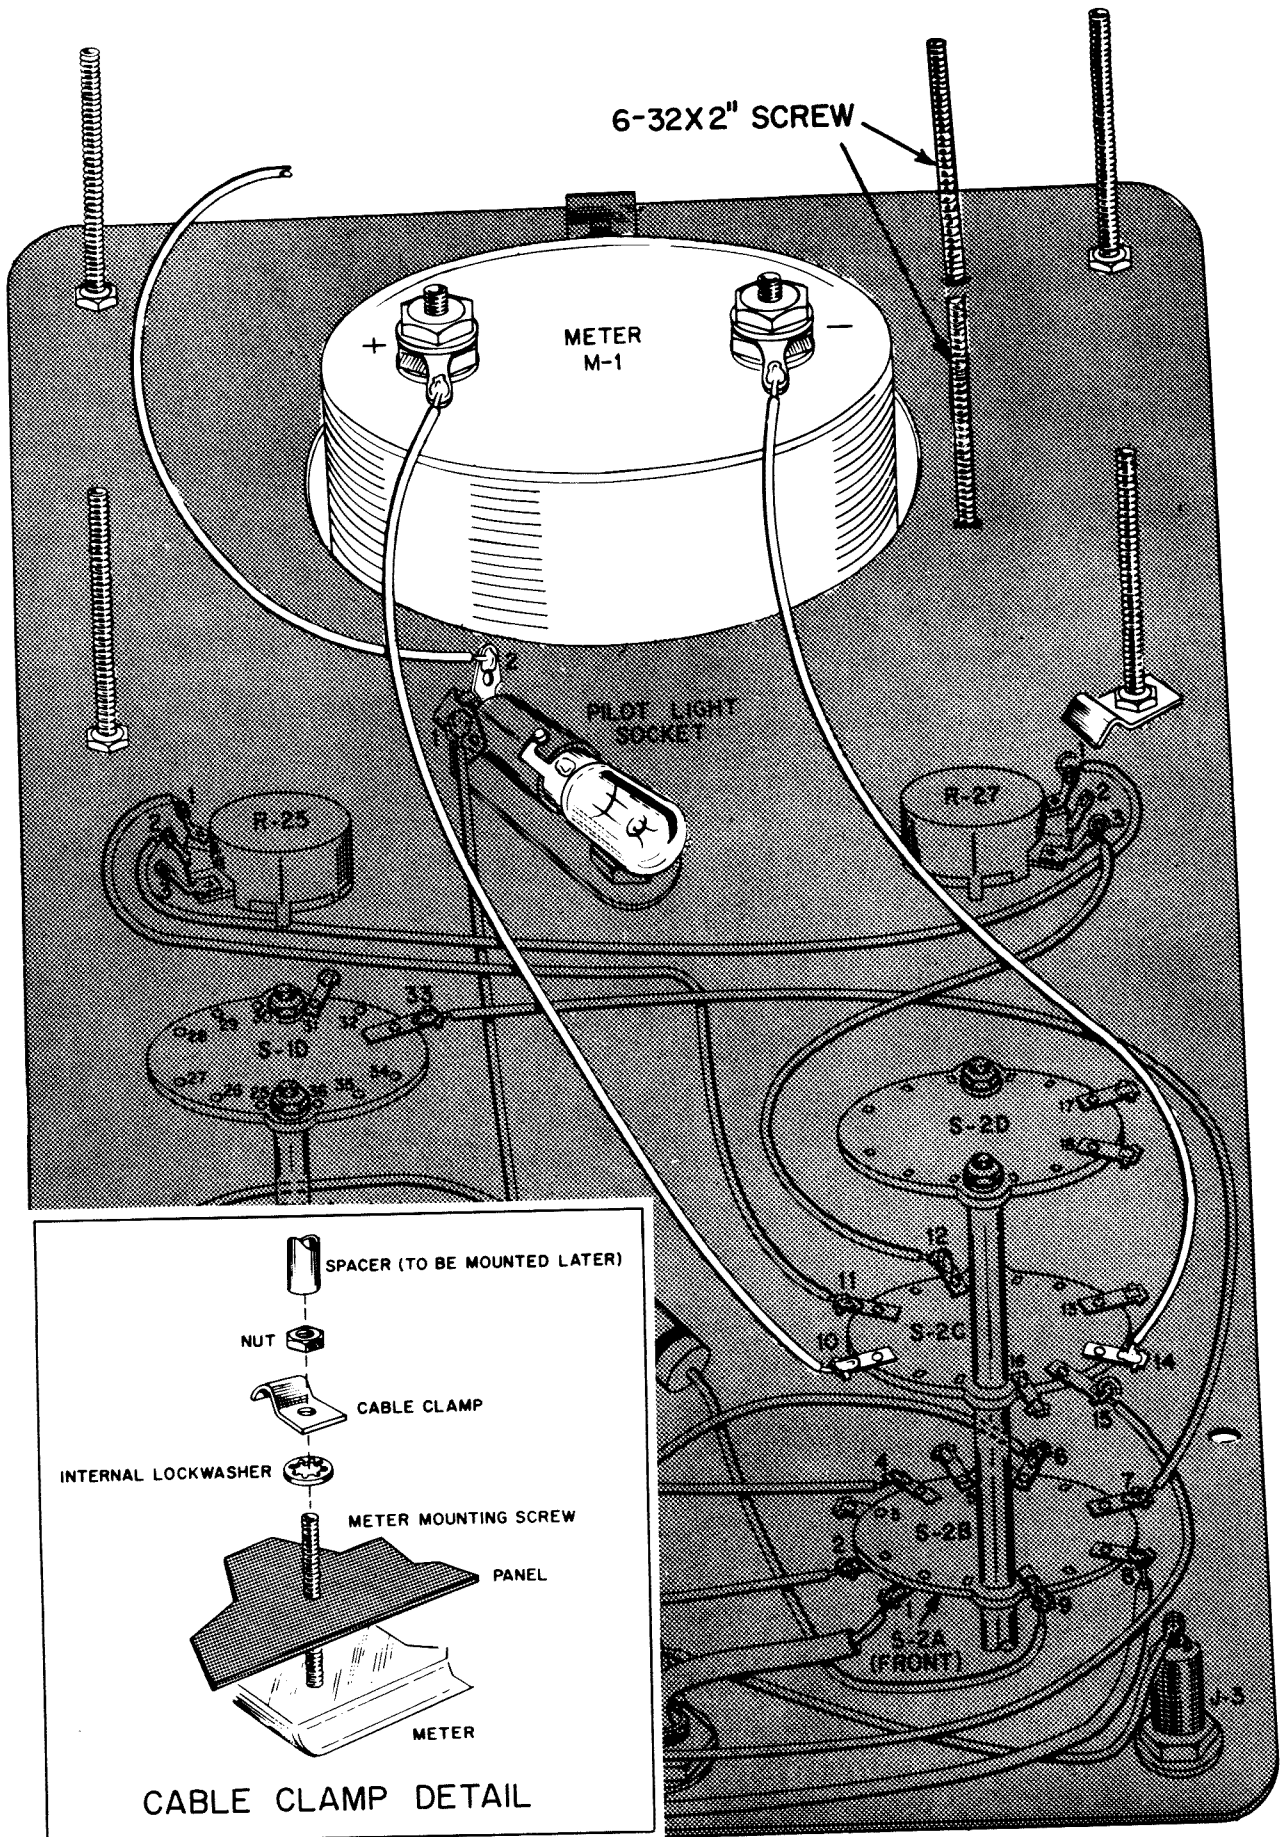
HOW TO MOUNT AND WIRE THE METER
